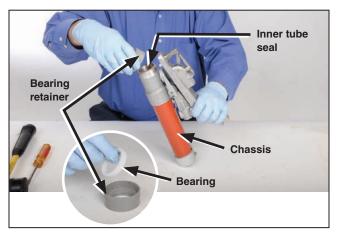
Remove the bearing retainer from the chassis along with the inner tube seal and the bearing.
